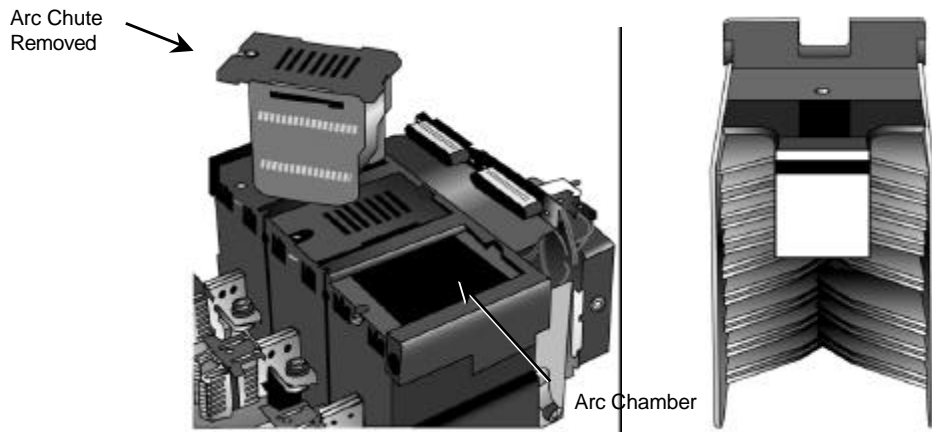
TOP REAR VIEW MAGNUM DS CIRCUIT BREAKER SHOWING ARC CHAMBERS AND ONE ARC CHUTE REMOVED
